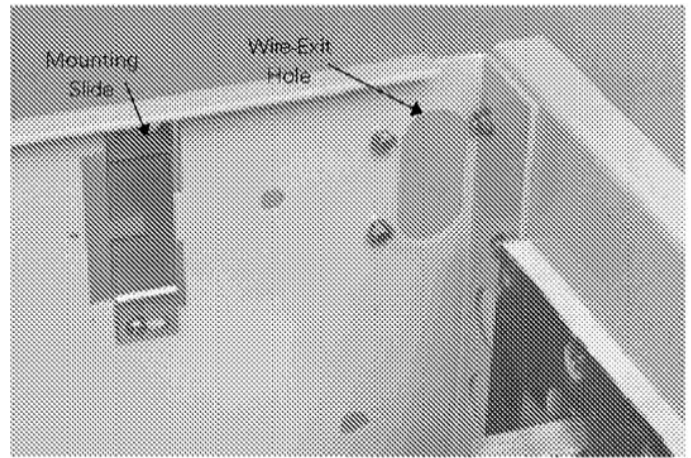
Inside rear corner of the type 2 draw out substructure showing the wire exit hole and the mounting slide
